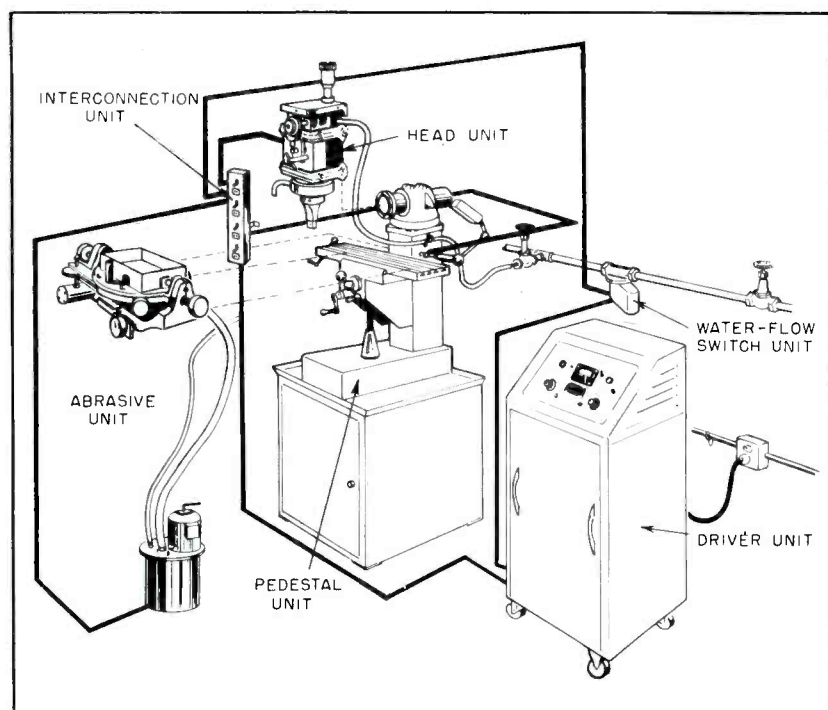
Diagram of the impact grinder showing all units of the equipment
